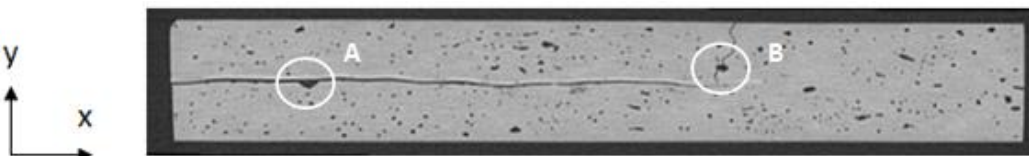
c): CT scan position 2 showing each crack passing through a huge void "A" and "B"
